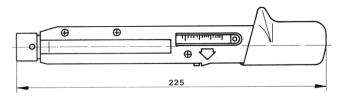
4 ... 20 N·m torque wrench Type 1300A39
